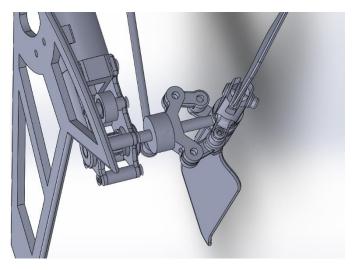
Slider and Rotor Blade Mechanism (Perspective 2).
